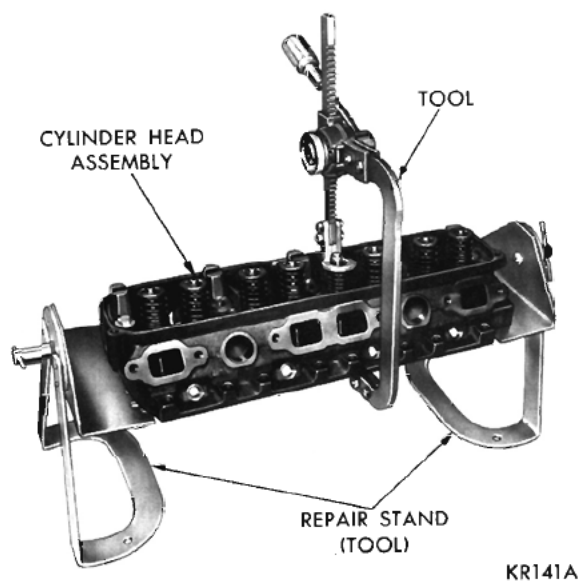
Compressing Valve Spring Using Tool C-3422A (Typical)
